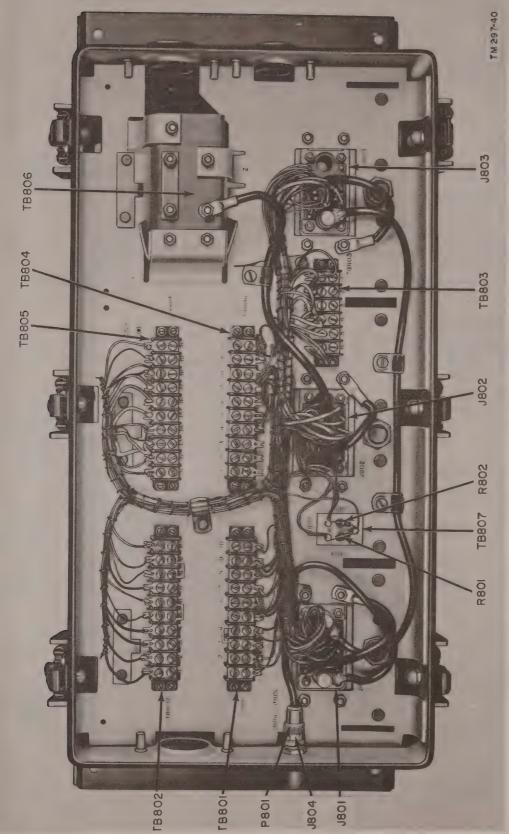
Electrical equipment cabinet CY-938/VRC, rear view with cover removed.
